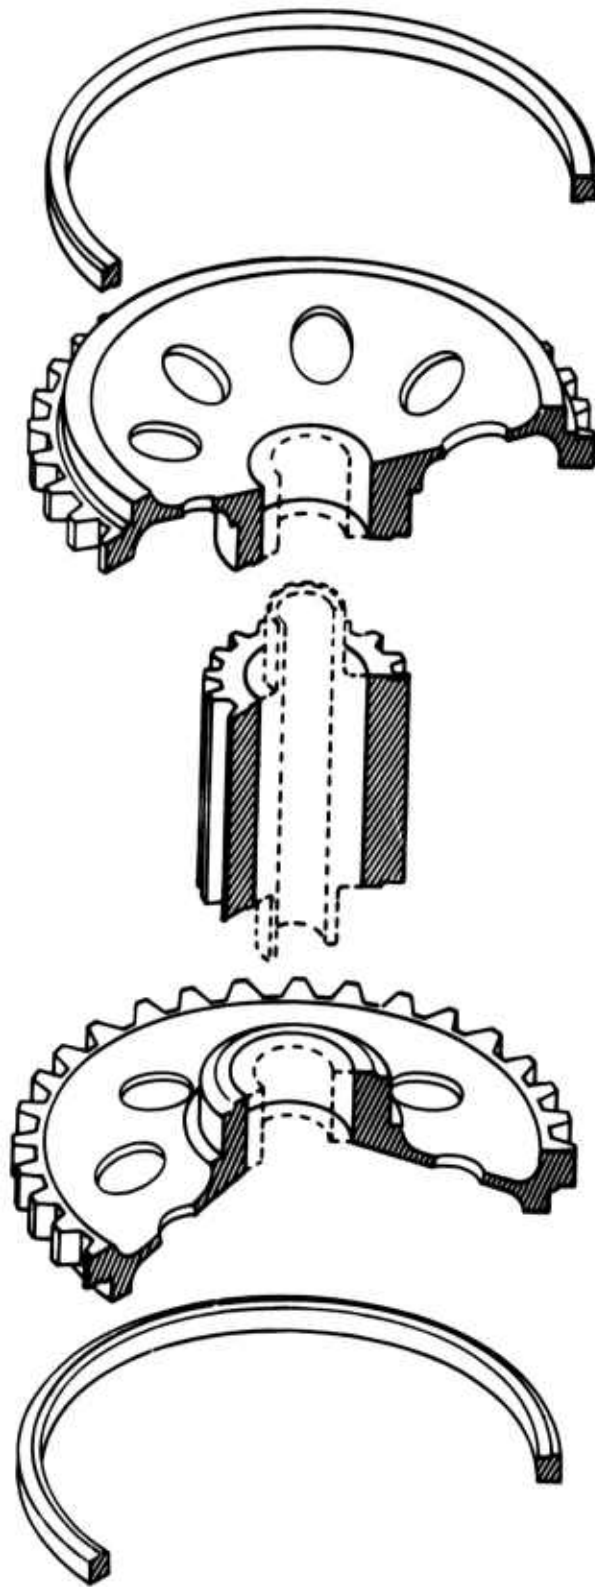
First-Row Pinion - Redesigned - Exploded View.
